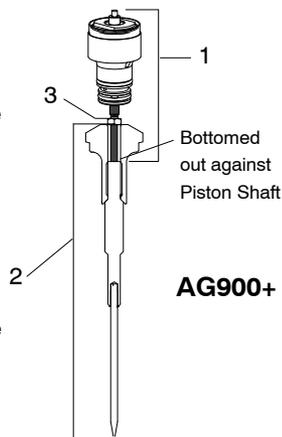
Piston/Cartridge Assembly and Needle Assembly
